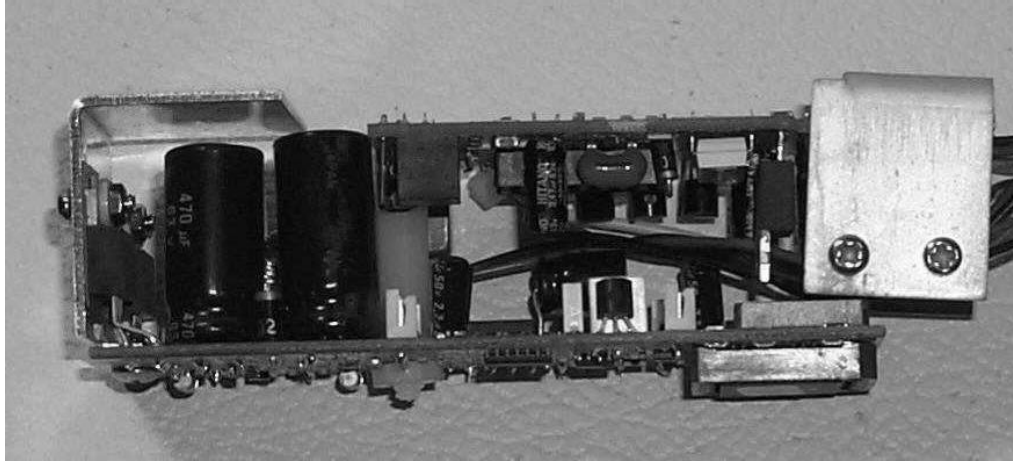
Back to back Mounting of LCRU and RS 2.5 Board
